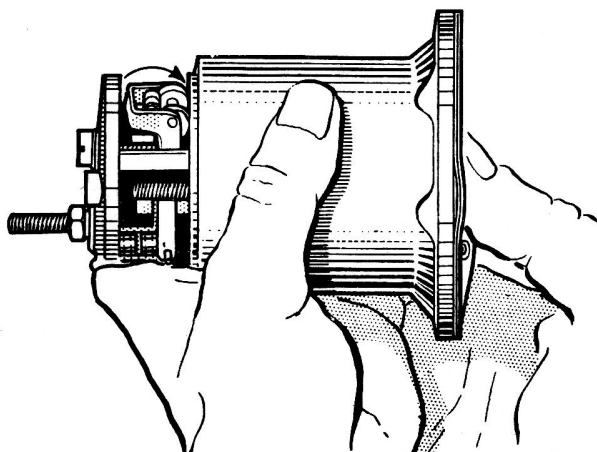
Checking 'throw-over' of the toggle mechanism
